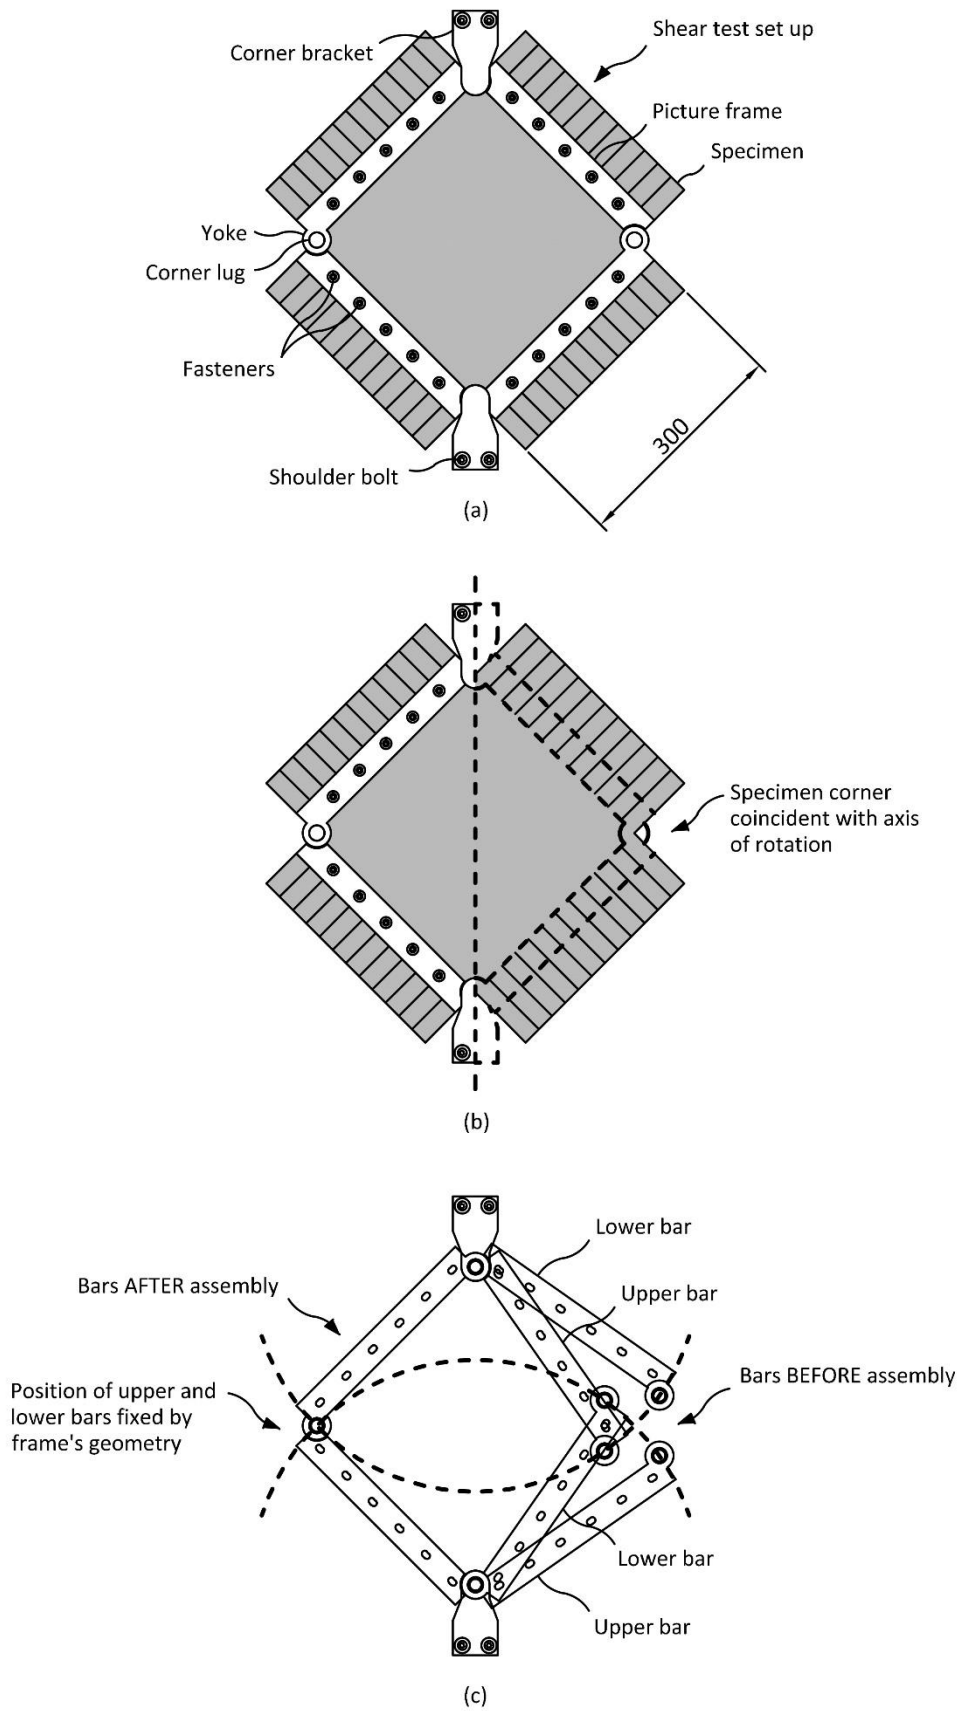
The novel picture frame design, showing (a) assembled frame with a fabric test specimen fully restrained; (b) cut-away view illustrating the specimen's position in the frame; and (c) aligning the upper and lower bars during assembly
